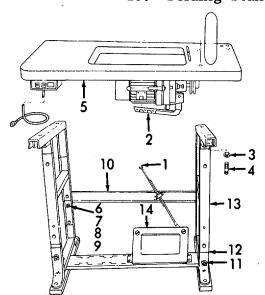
Darning Sewing Machine Table, Disassembly.
